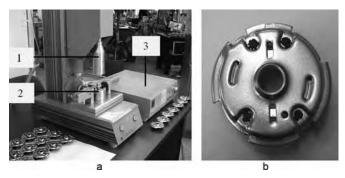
Ultrasonic welding of plastic materials a - welding equipment; b - rivet welding.
